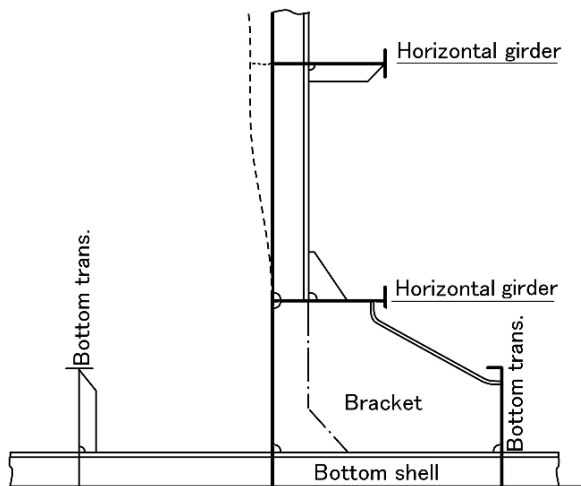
Large bracket reducing deformation of horizontal girder
